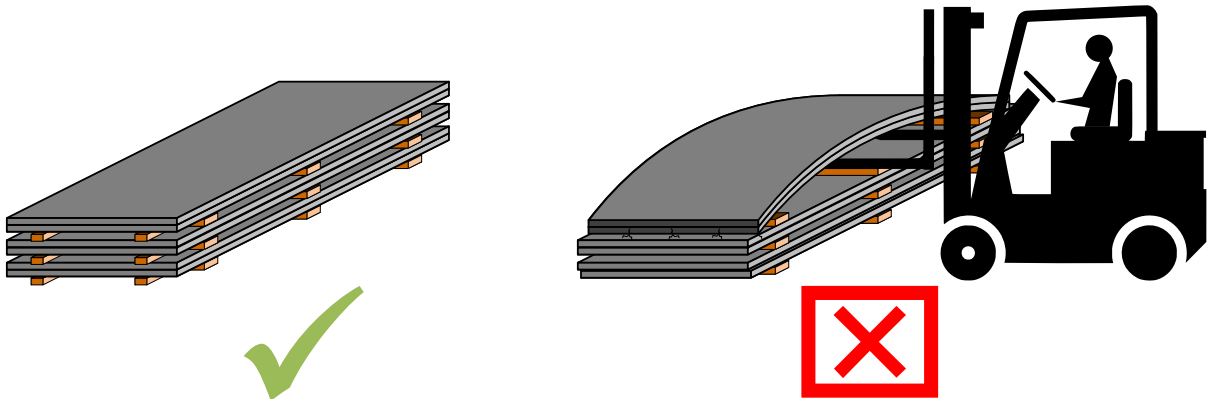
Use of supporting timbers at end faces to prevent damage by sagging plates
